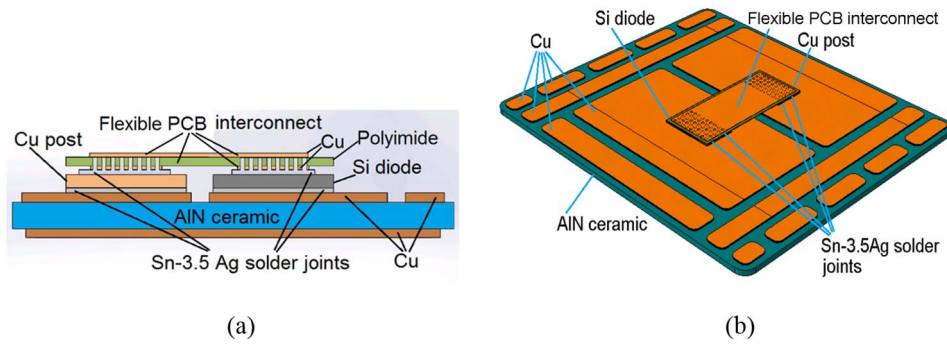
The flexible PCB interconnect ST Si diode sample with the Sn-3.5Ag solder joints: (a) cross-sectional schematic (not to scale); and (b) three-dimensional ISO view of the design graph.
